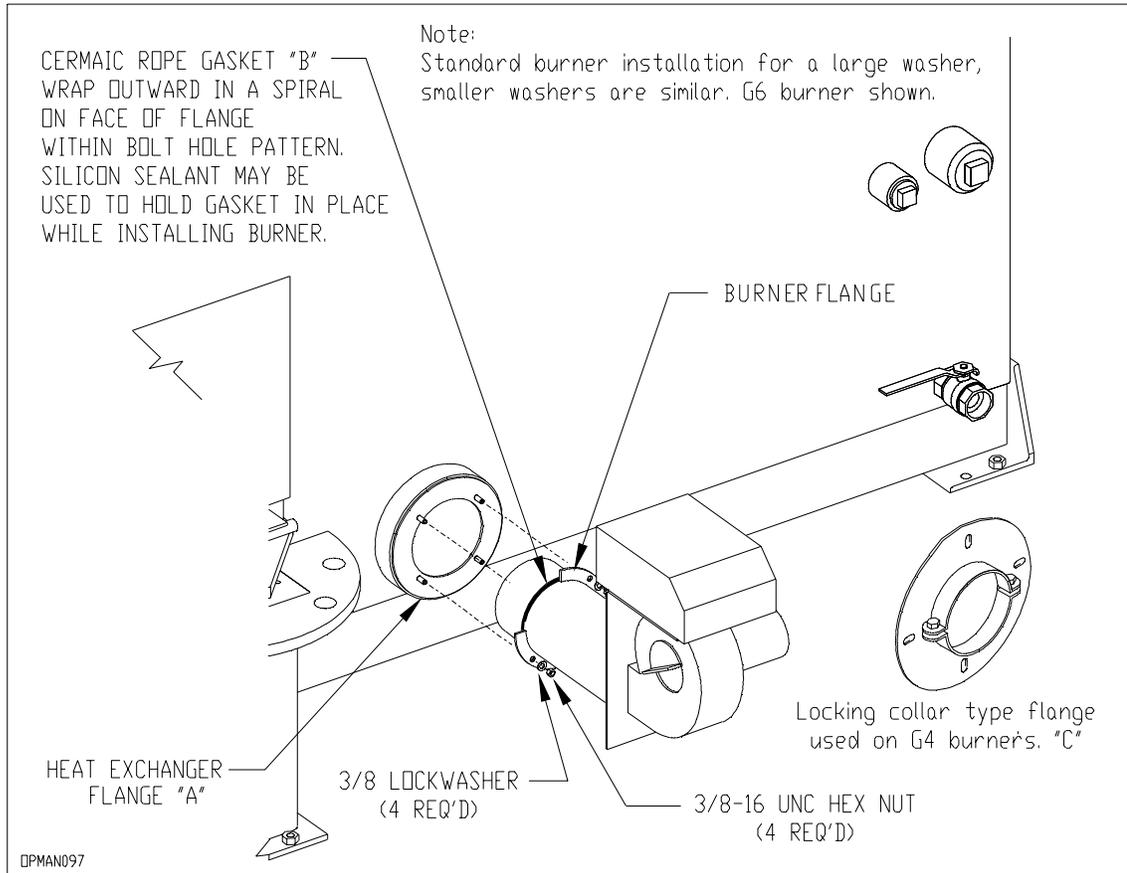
4: Mounting the Combustion Burner (Up to 400,000 and 800,000 BTU)
